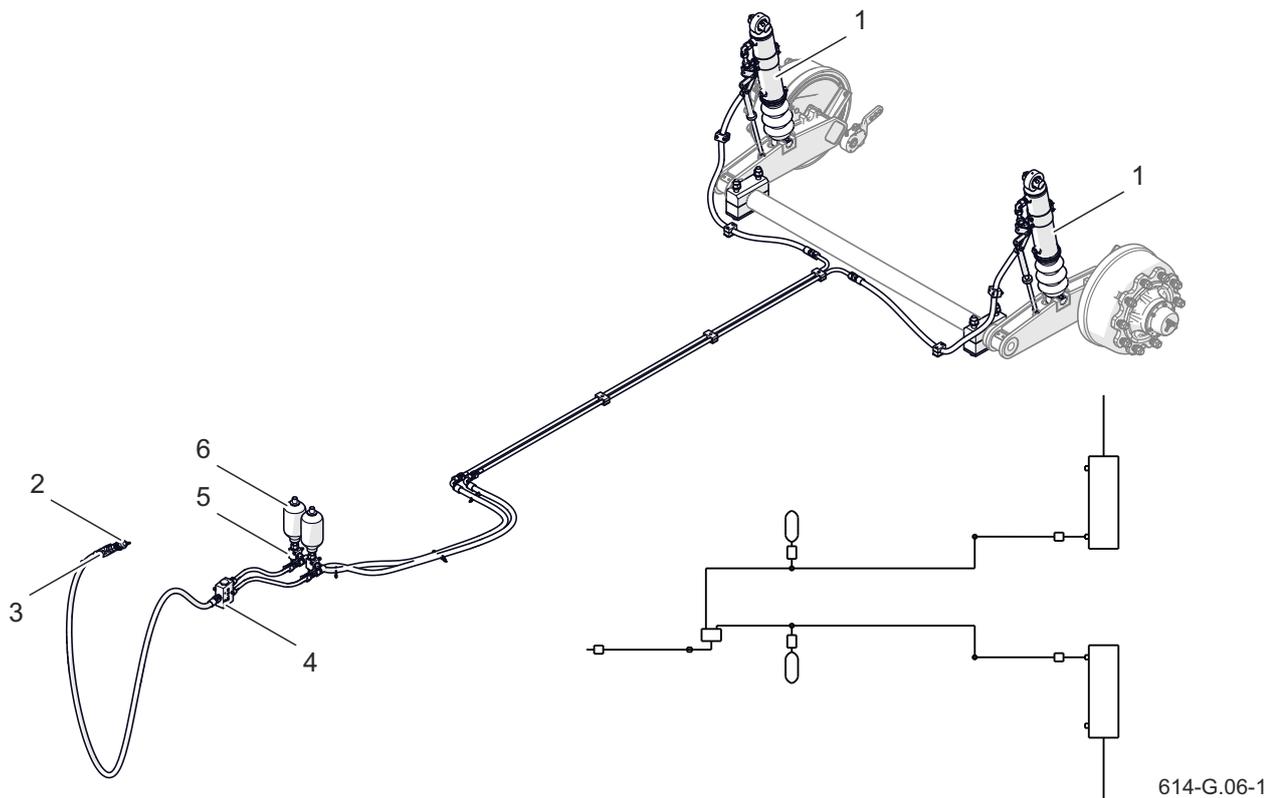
Construction and diagram of the hydraulic system of lowering the suspension (1) hydraulic cylinder (2) quick coupler (3) hydraulic valve (4) flow divider (5) hydraulic valve (6) hydraulic accumulator
